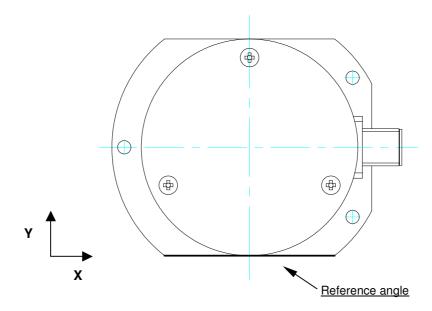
Reference angle of the inclinometer, top view.
